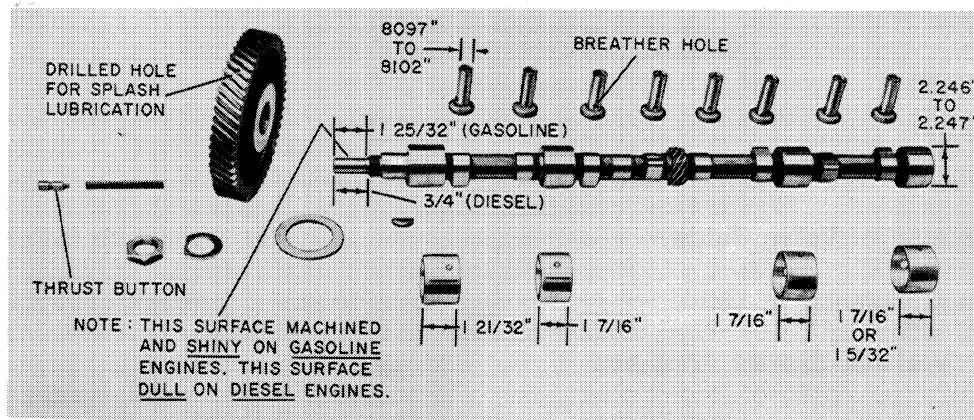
Camshaft, Camshaft Bushings and Valve Push Rod Lifters A267 and A301
